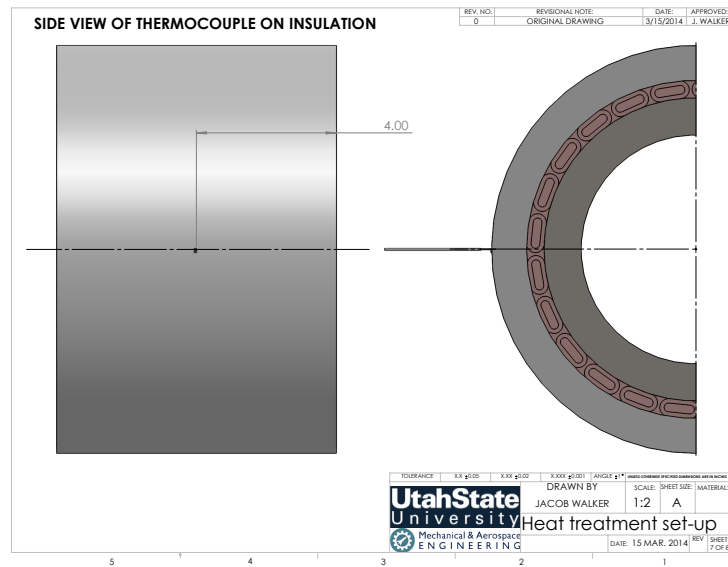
Drawings of Heat-Treatment Set-Up; Page 7
